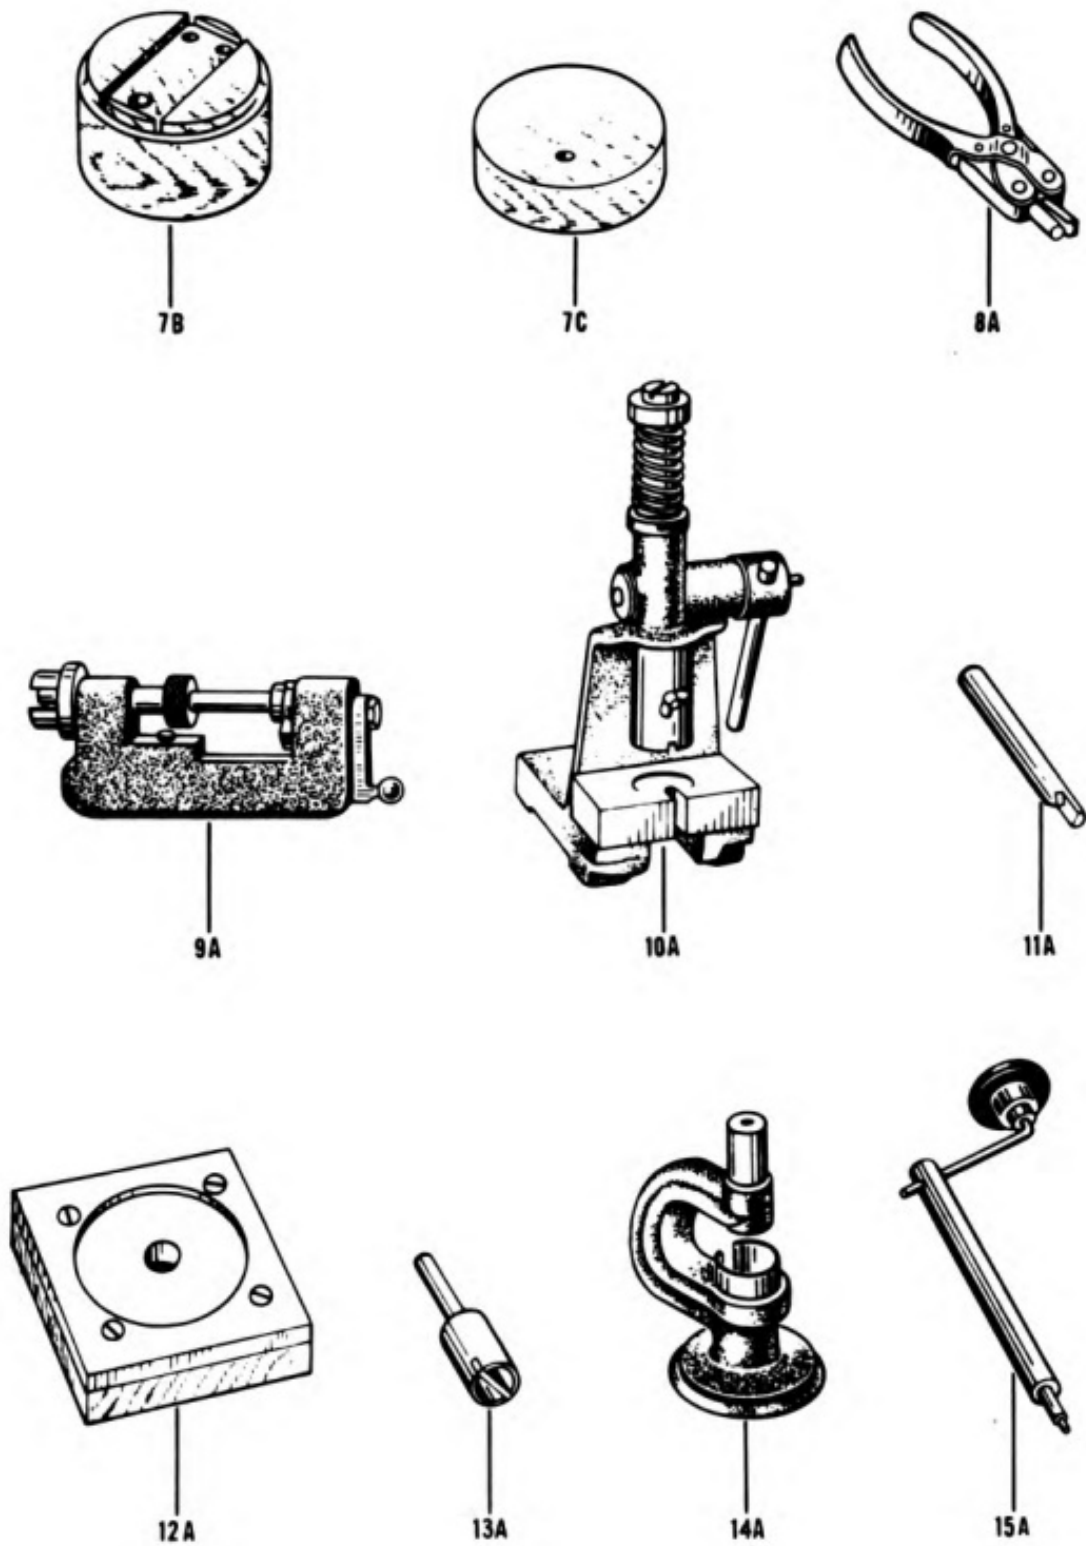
U.S. Navy Clock Special Tools and Fixtures
